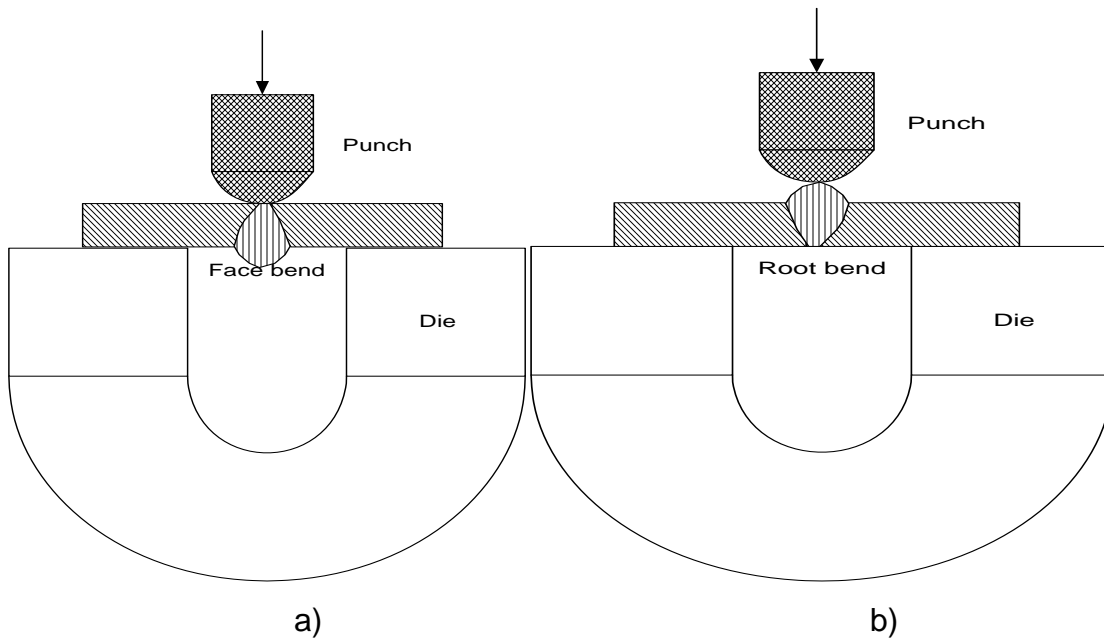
Schematics of guided bend tests a) face bend and b) root bend.
